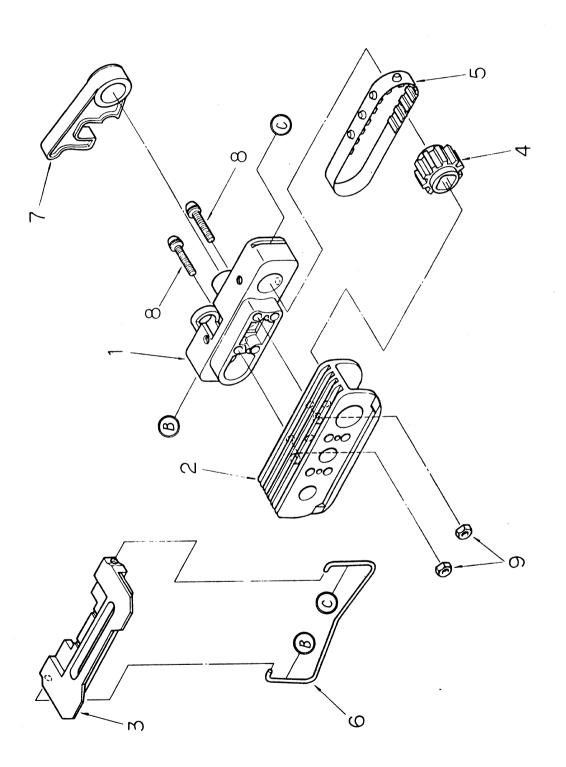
Sprocket Assembly (R) (FMX-35100-2)
